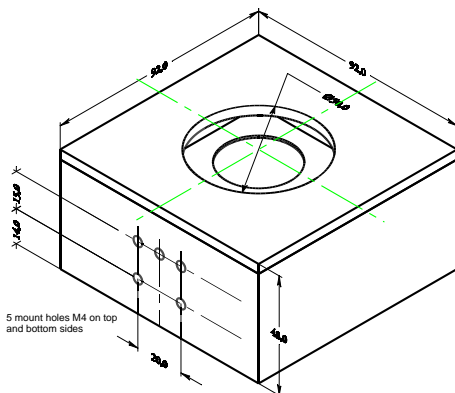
Technical drawing of the package and mounting holes of the 30mm 39/59/79-channel MMDM
